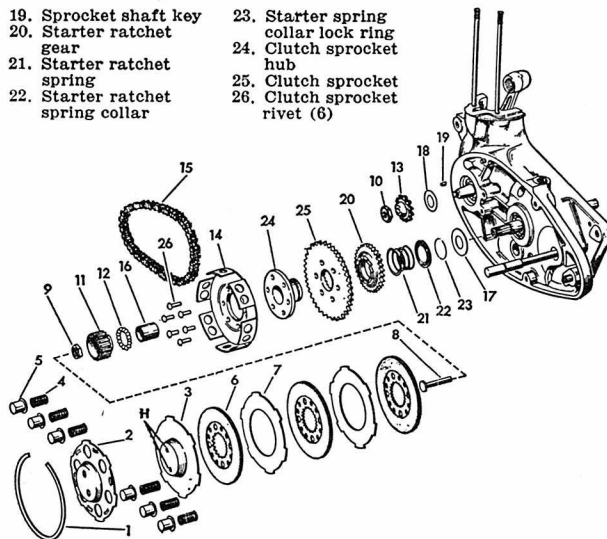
Exploded view of the clutch assembly.
